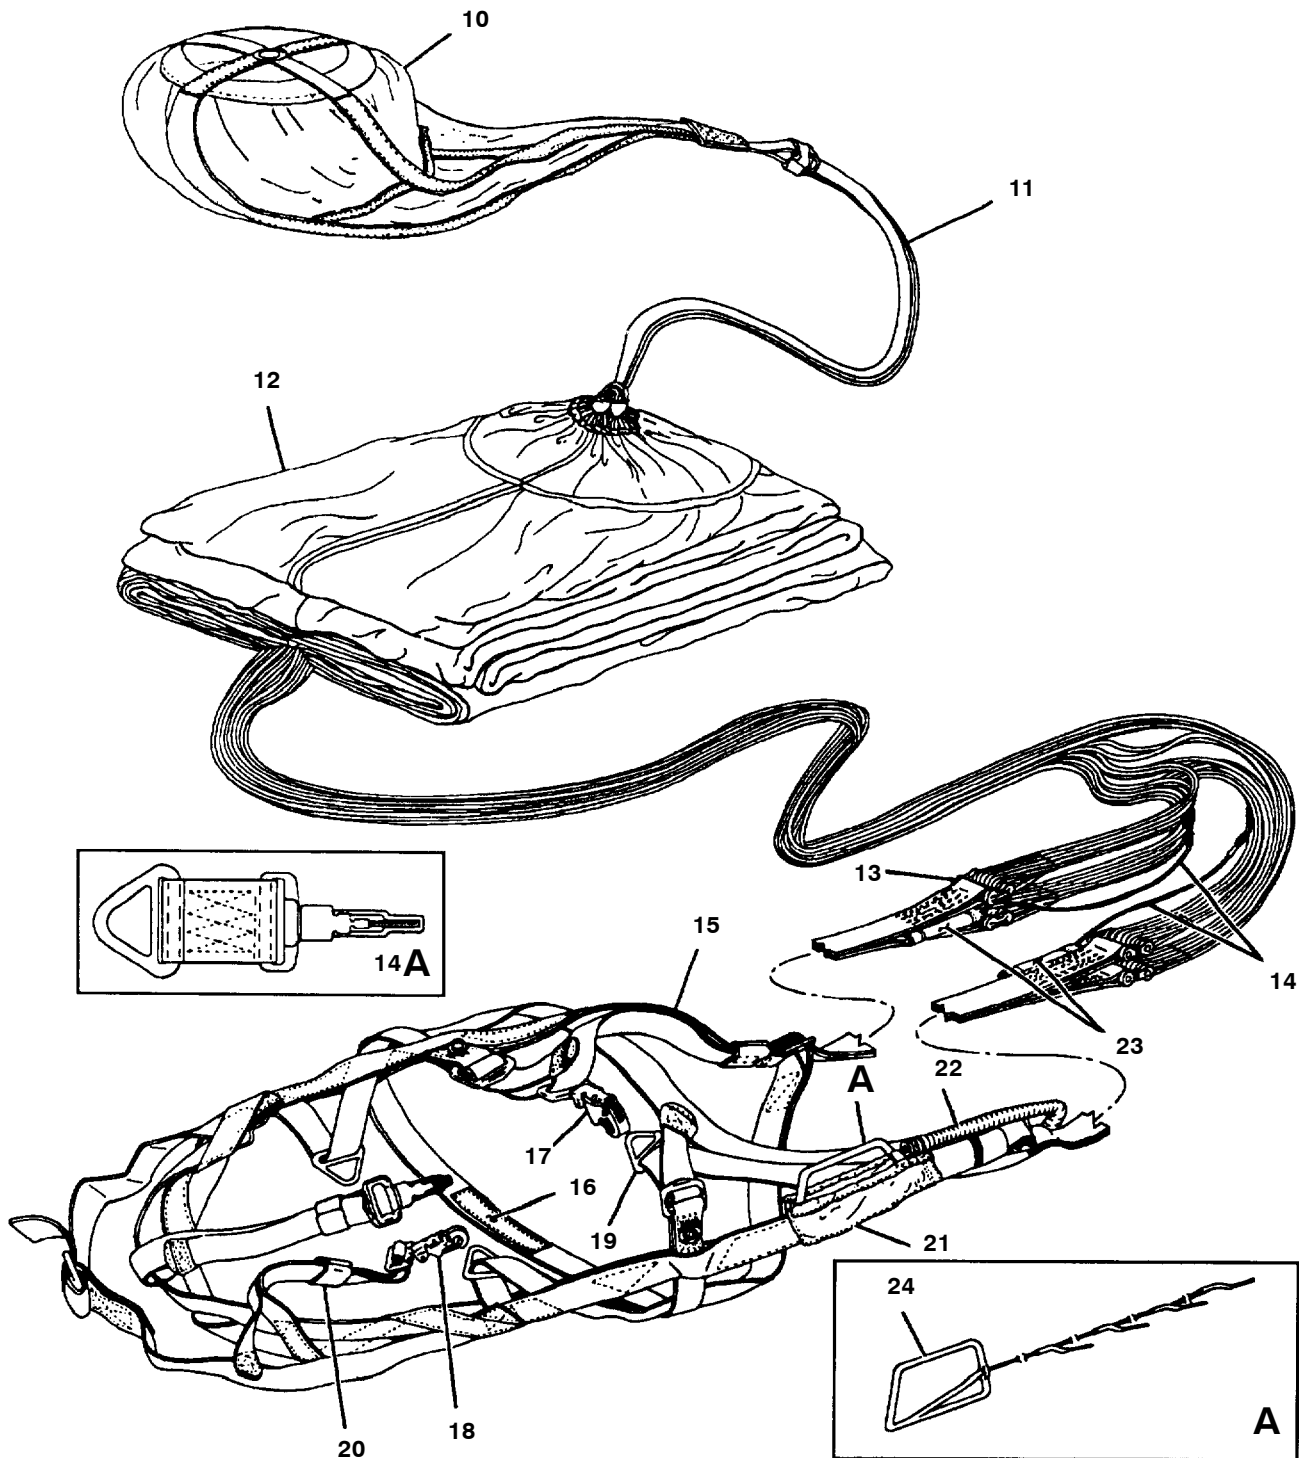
NB-8 Personnel Parachute Assembly (Sheet 3 of 6)
